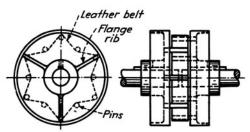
This Webster Manufacturing Company coupling uses a single endless leather belt instead of a series of bands, as in Fig. 276. The belt is looped over alternate pins in both flanges. This type has good shock-resisting properties because of belt stretch and the tendency of the pins to settle back into the loops of the belt.
